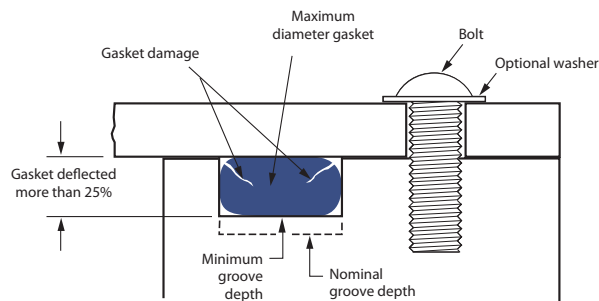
Section A-A of Assembled Enclosure Flange and Gasket (Sectioned midway through gasket and groove)
